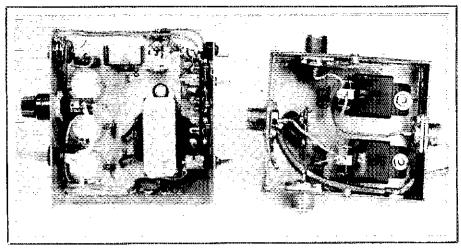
Photographic view of the interior of the power-supply/control unit. The LED dropping resistors are mounted on a terminal strip on the inside surface of the front panel. The power supply is assembled on a PC board that is supported above the chassis on ¼-inch spacers. Adhesive-backed plastic feet (4) are affixed to the bottom of the box. Dymo tape labels identify the panel controls.
